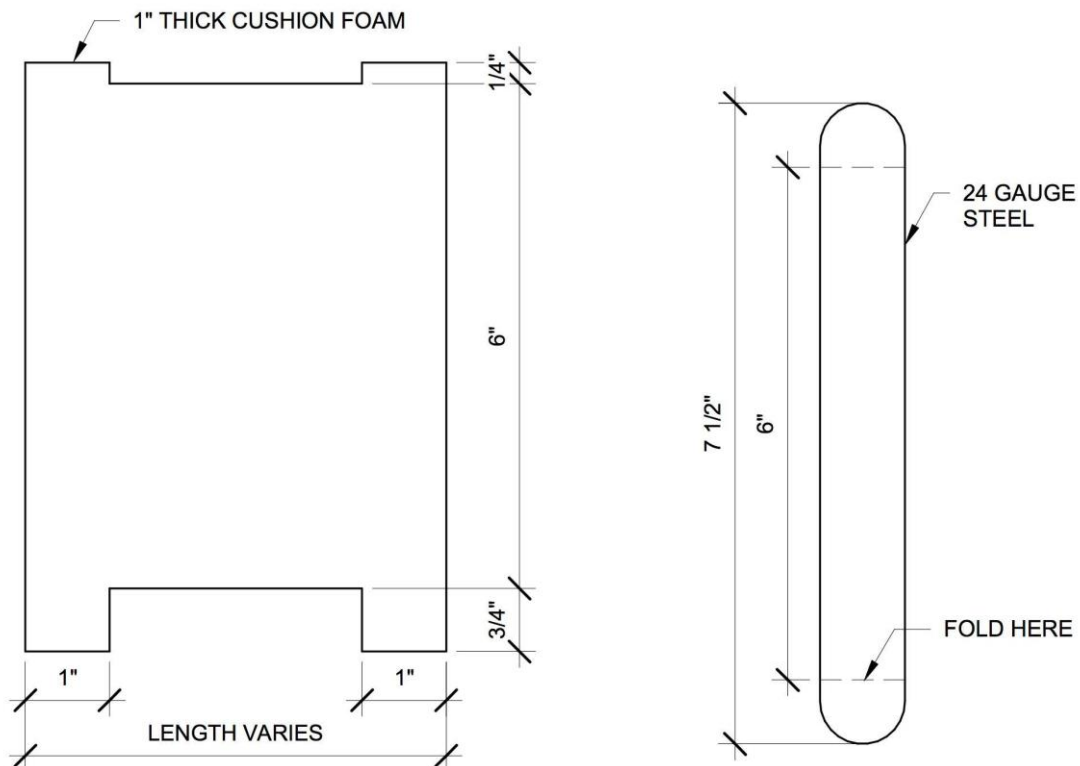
Foam Wall Design (left) and Chord Design (right)
